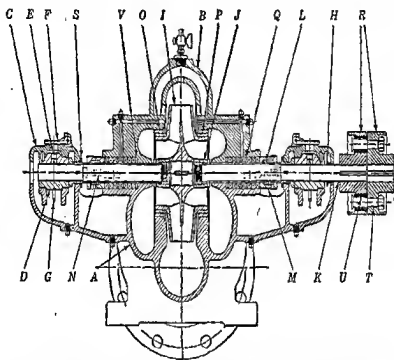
Dayton-Dowd single-stage double-suction pump. A, lower casing; B, upper casing; C, bearing bracket cap; D, bearing, lower half; E, bearing, upper half; F, oil-hole cover; G, oil ring; H, oil guard; I, impeller; J, impeller nut; K, shaft; L, shaft sleeve; M, gland halves; N, gland bolts; O, casing wearing ring; P, impeller wearing ring; Q, lantern ring; R, coupling halves; S, thrust collar and water slinger; T, coupling pins and nuts; U, coupling bushings; V, packing-box bottom.
